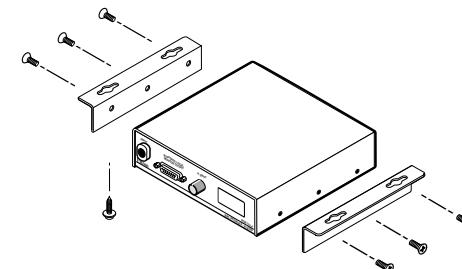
Attaching the under desk brackets (part number 70-077-01)
